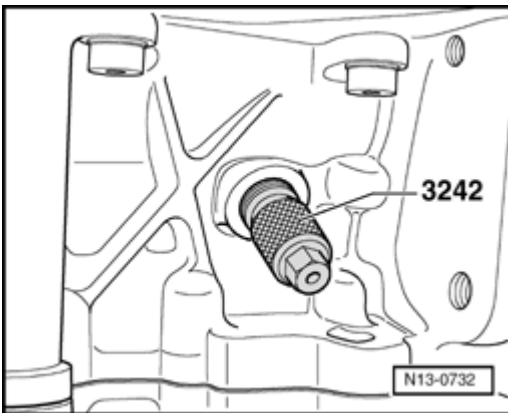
Crankshaft Holder 3242 - Securing Crankshaft From Turning
